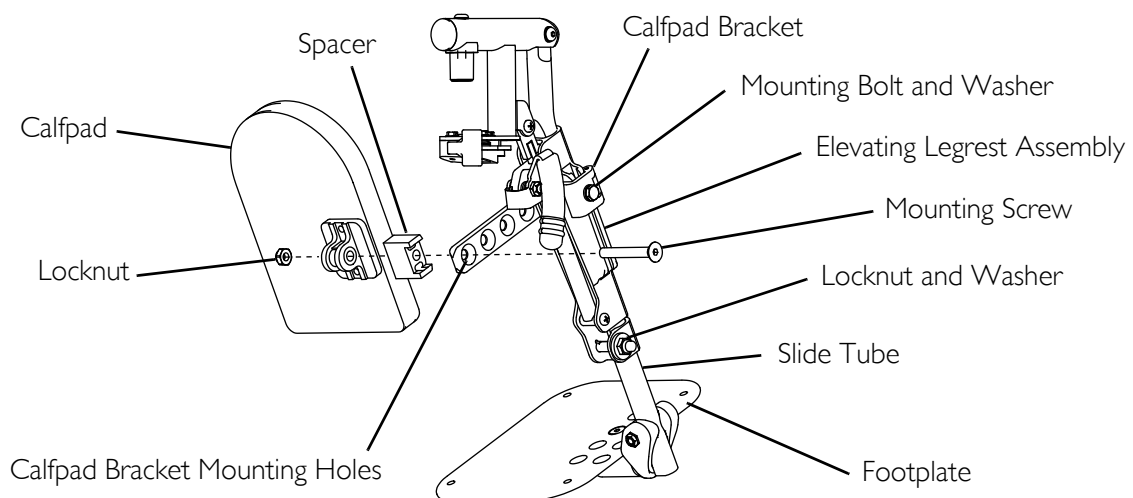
Adjusting Footplate Height and Calfpad Height/Depth
